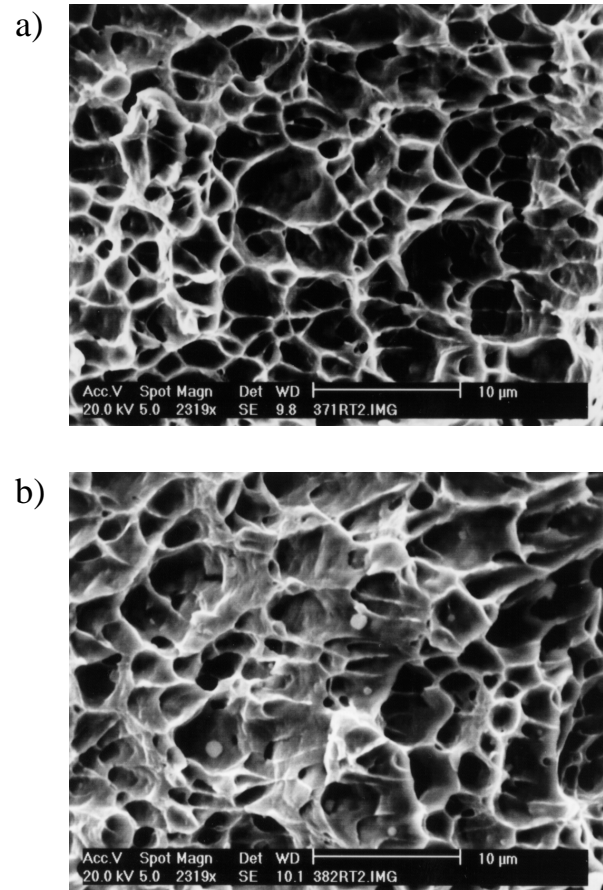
Room temperature fracture behaviour of welds a) H4 and b) H5.
